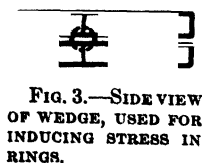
SIDE VIEW OF WEDGE, USED FOR INDUCING STRESS IN RINGS.
